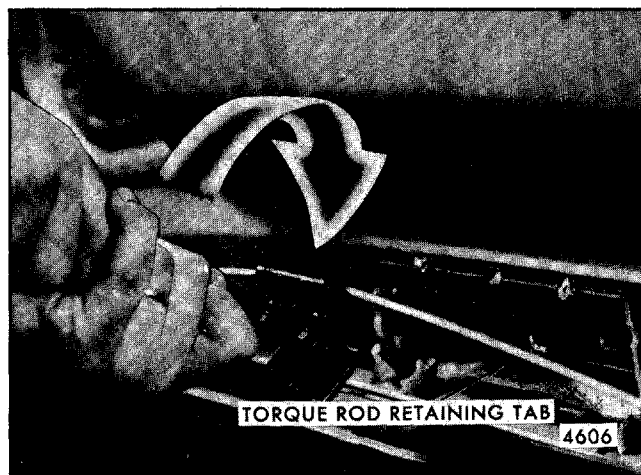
Rear Compartment Lid Removal - "11" Styles
